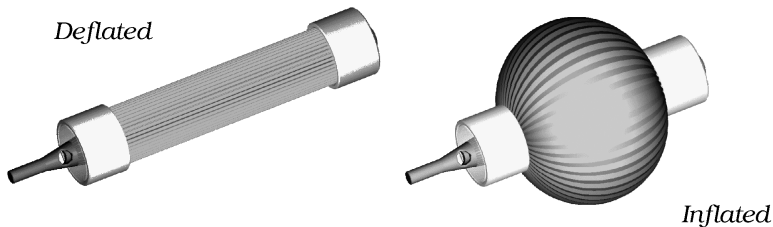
CAD drawing of the deflated and inflated state of the PPAM.
